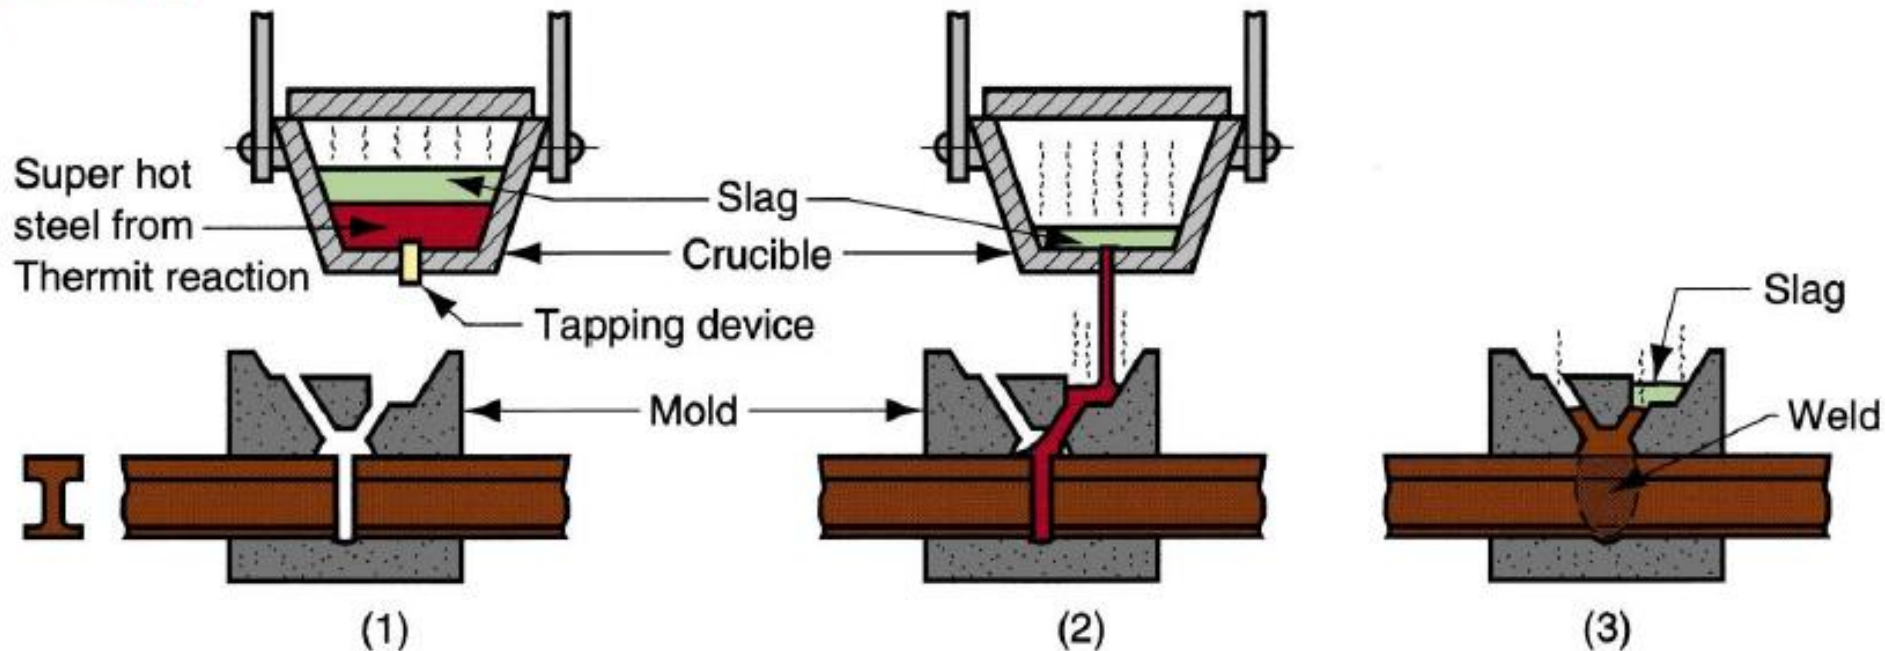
Thermit welding: (1) Thermit ignited; (2) crucible tapped, superheated metal flows into mold; (3) metal solidifies to produce weld joint.
